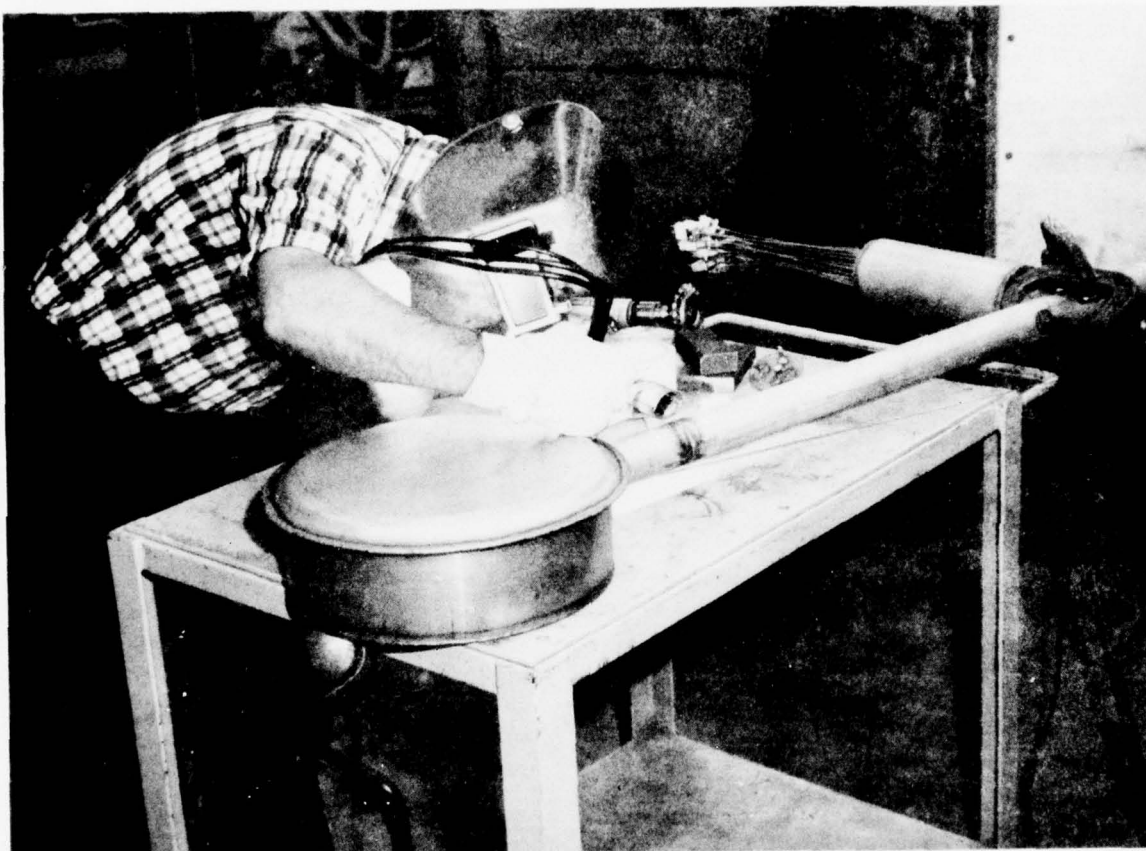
Laminated Wheel Blank Retort Being Welded After Backfilling with Argon.
